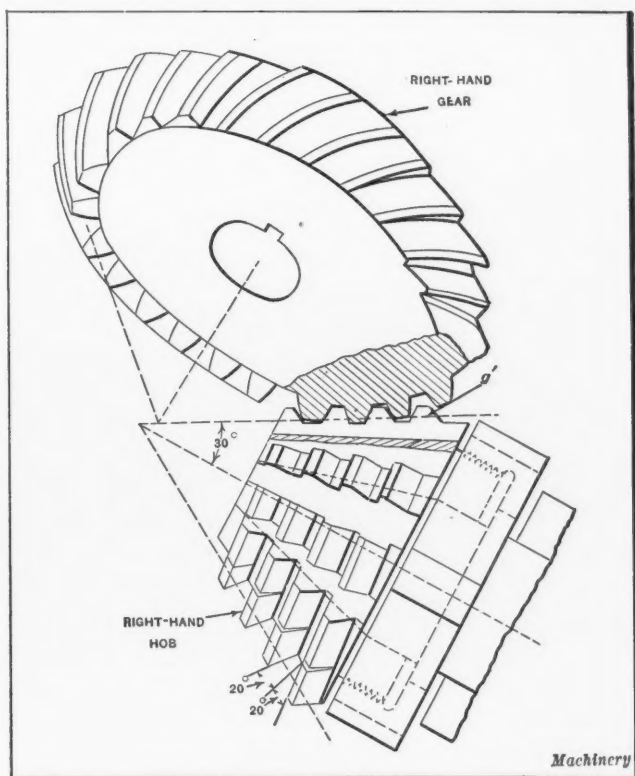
Tapered Hob, and Modified-involute Spiral Bevel Gear of the Extended Type
